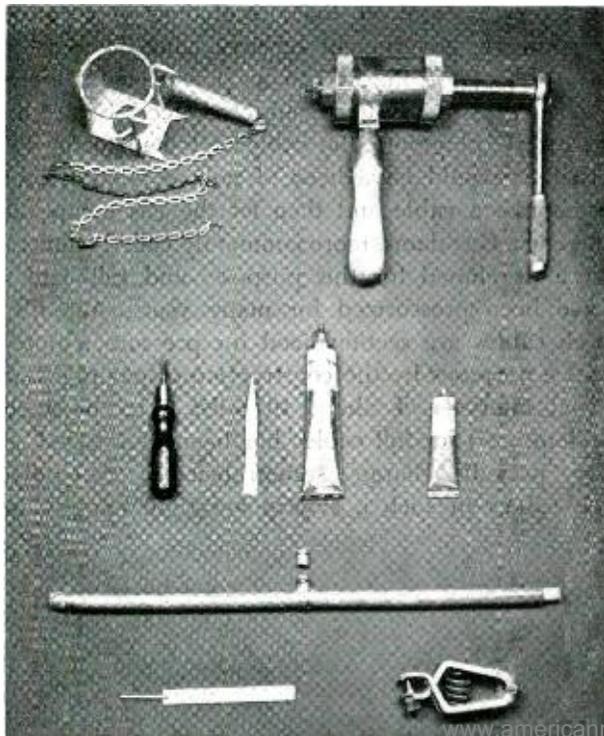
The tools required to make a hot-asphalt plug. Constrictions in the cable sheath may be seen in the sample plug at the bottom.
